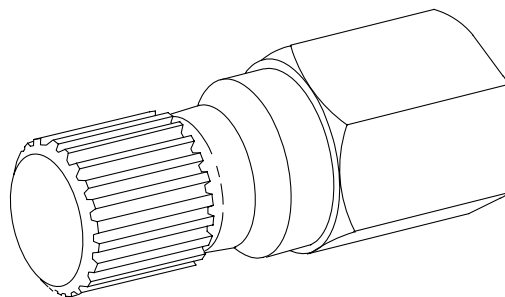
PWA 21875 REGULATOR ASSEMBLY
